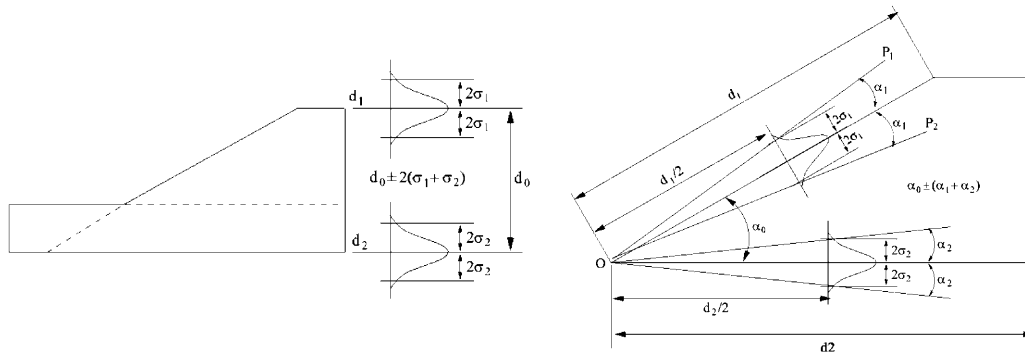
Process for (a) dimensional and (b) angular tolerance checking.
